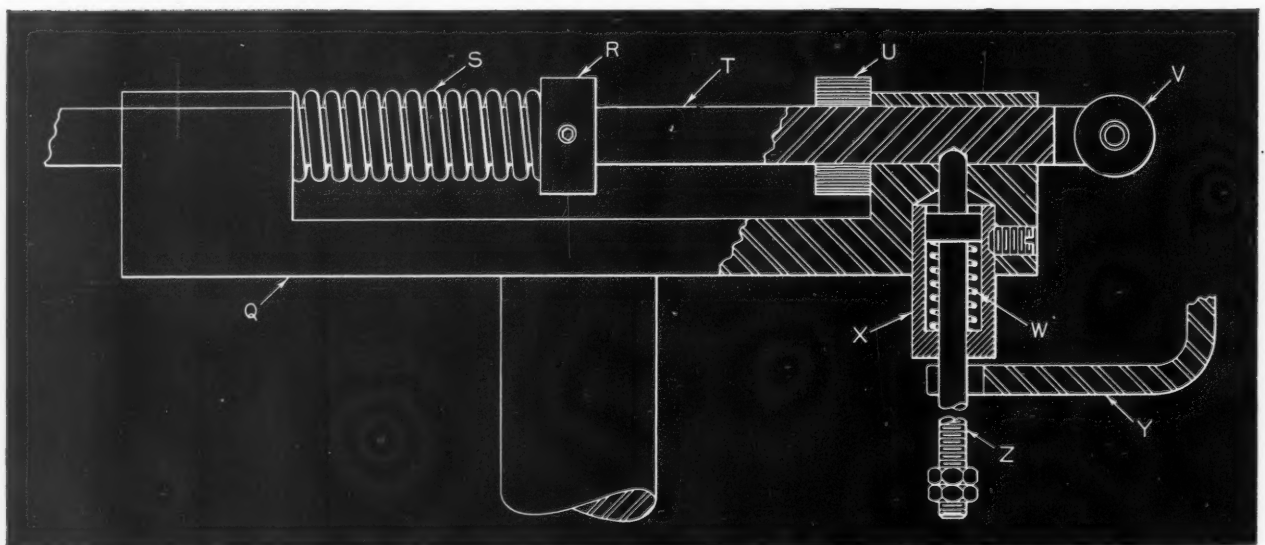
Construction details of shaft *T* and trigger-releasing mechanism employed to impart spinning motion to holder *C*, Fig. 3, through ratchet wheel *B* and pawl *D
